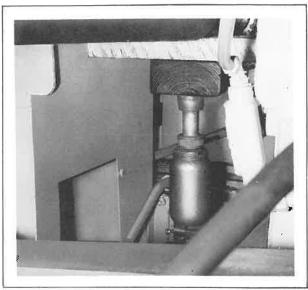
BLOCKING LONG SHAFT AT COMPRESSOR END.
